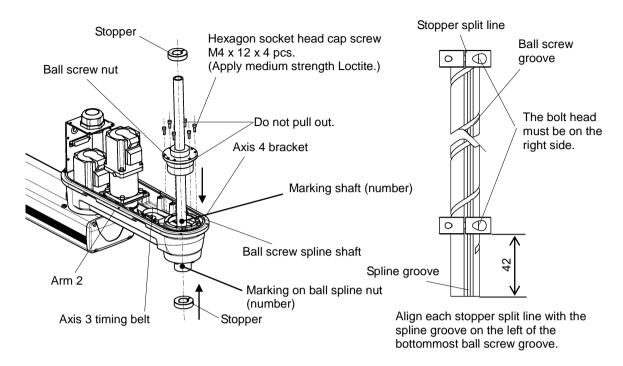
Mounting ball screw spline nut (KHL-500, KHL-600, KHL-700)
